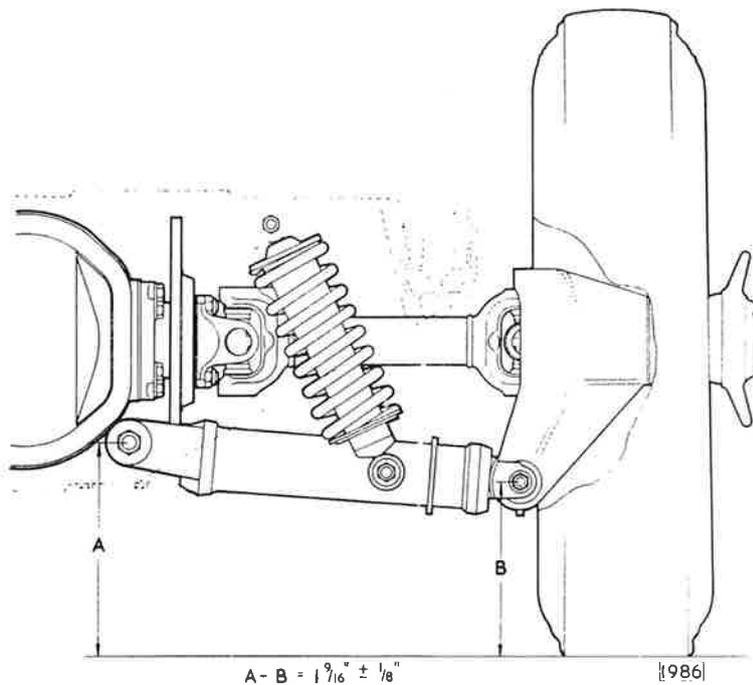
Showing the fulcrum points 'A' and 'B' on the rear suspension from which measurements should be taken
